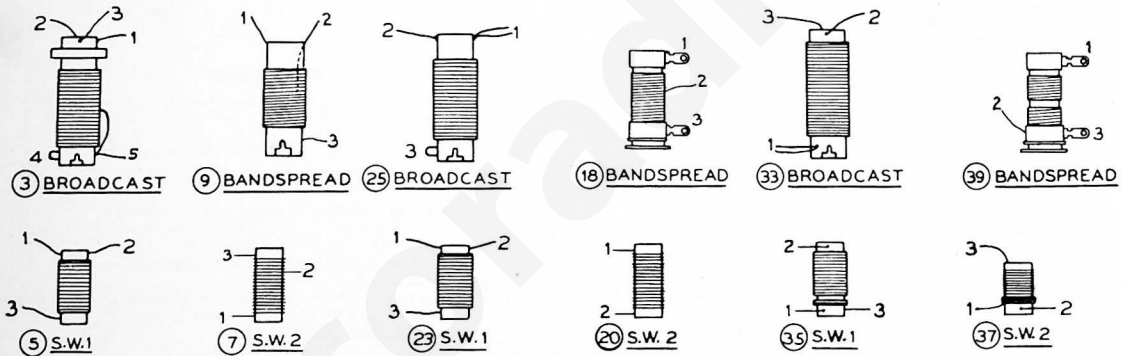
R. F. TRANSFORMER WIRING LOCATIONS
